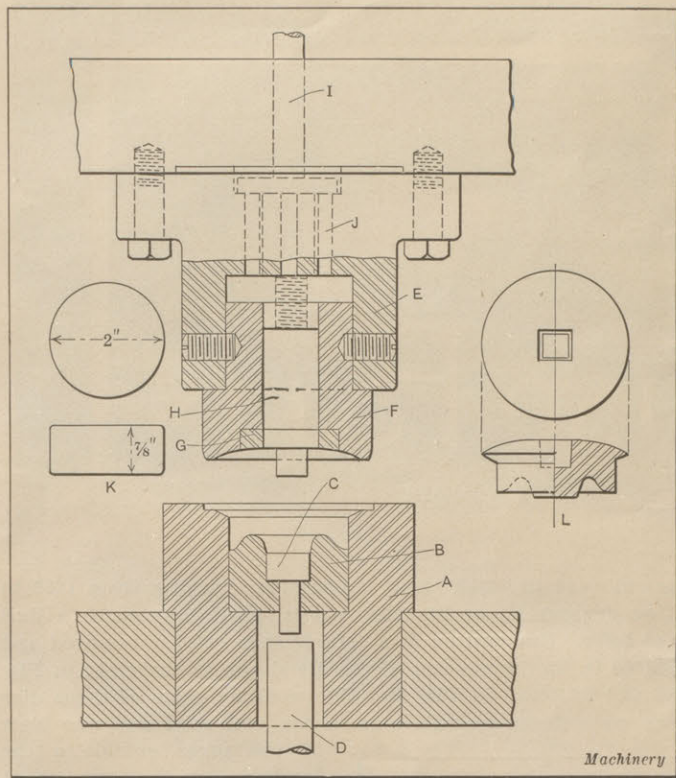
Diagram showing Construction of Tools for forging Brass Plug
